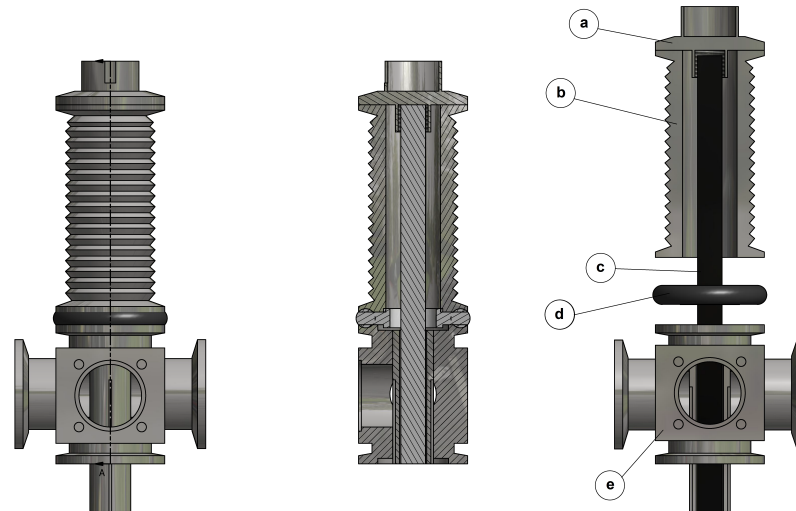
a) Force sensor housing. b) Bellows. c) Stainless steel rod. d) O-ring. e) connector block.
